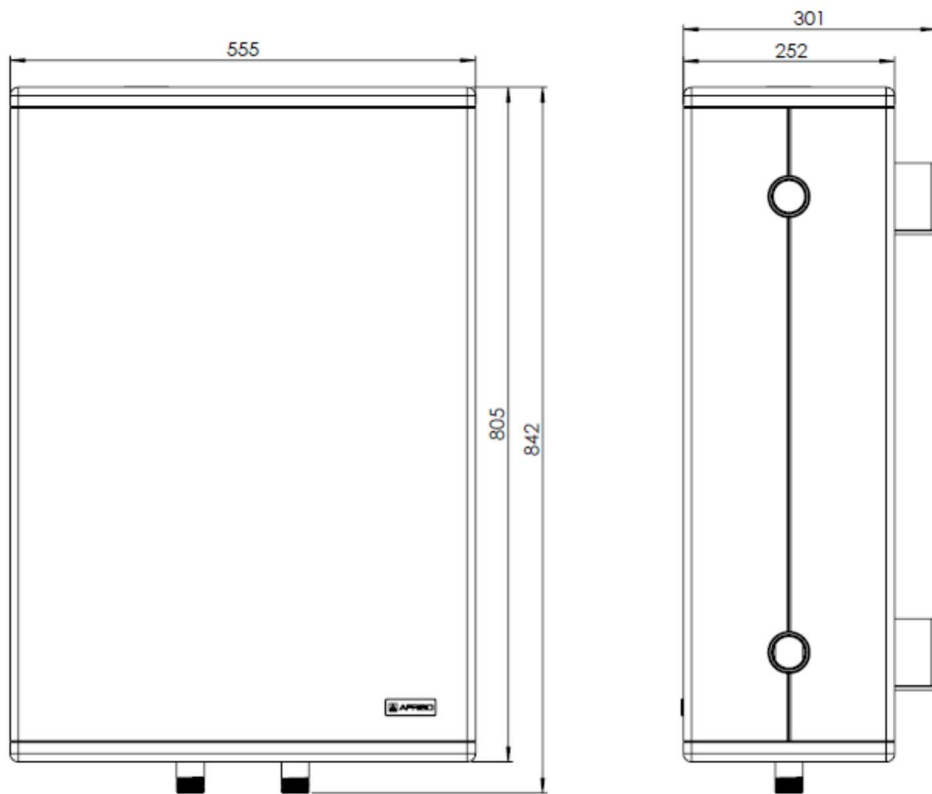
Dimension of buffer tank ABT 50 with insulation.
